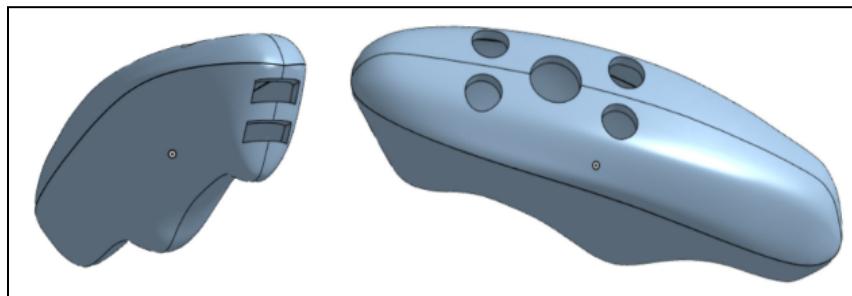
VR remote design. Top isometric view (left). Bottom Isometric view (right).
